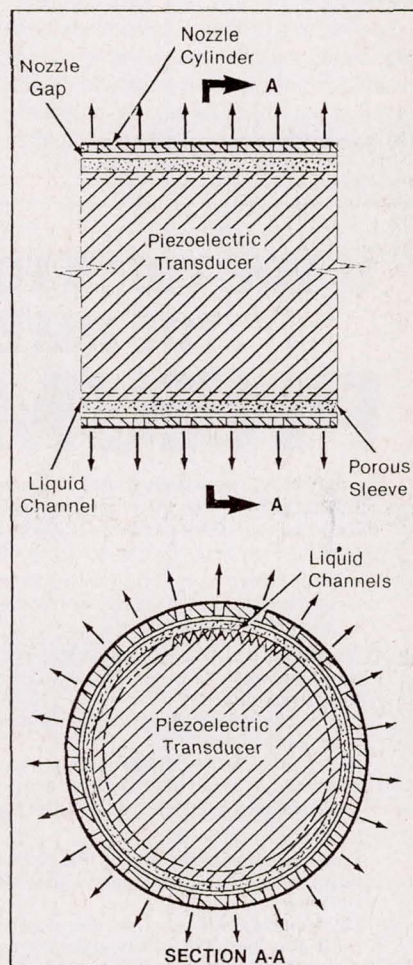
A Cylindrical Droplet Generator would spray liquid onto a hot outer cylinder.
